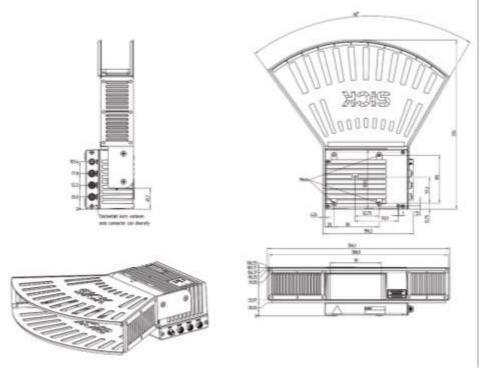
LMS4x21 dimensional drawing with laser protective cover
